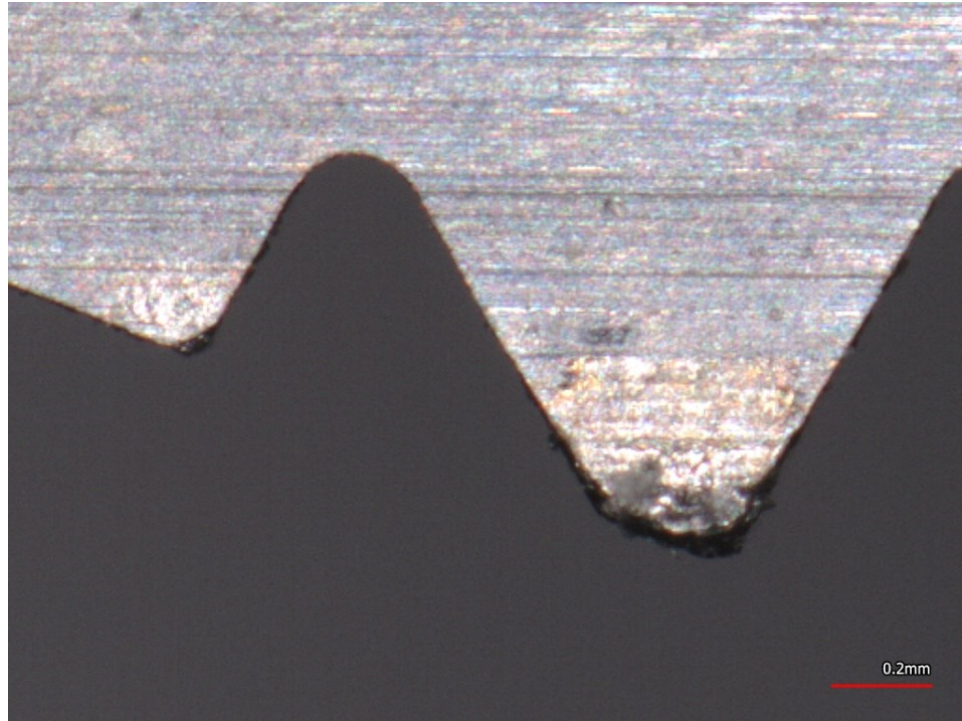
Cut tap flute wear after 28 holes. Crater wear is visible on the tool rake face.
